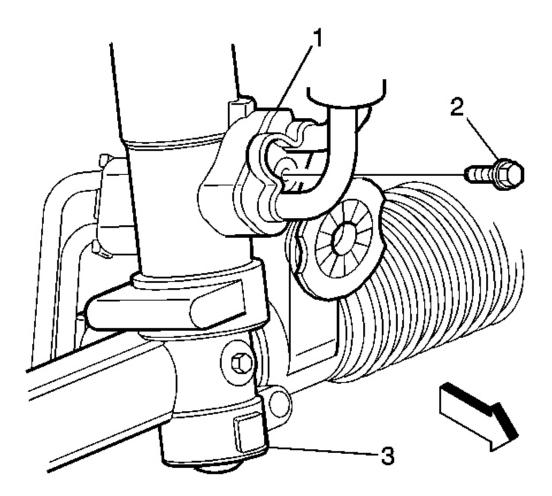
View Of Power Steering Hose Assembly, Mounting Bolt & Steering Gear Courtesy of GENERAL MOTORS CORP.
